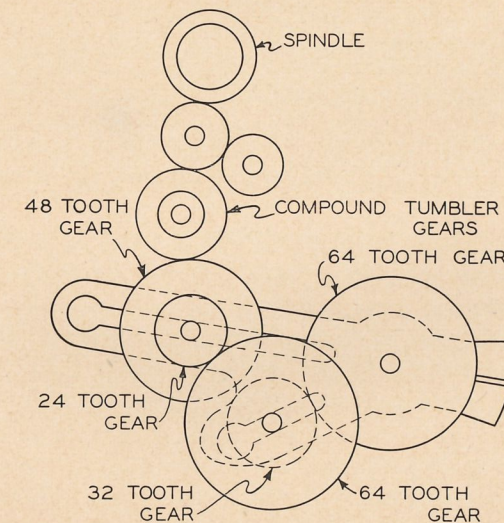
Gear set-up for .0078 inch carriage feed (see page 32).
